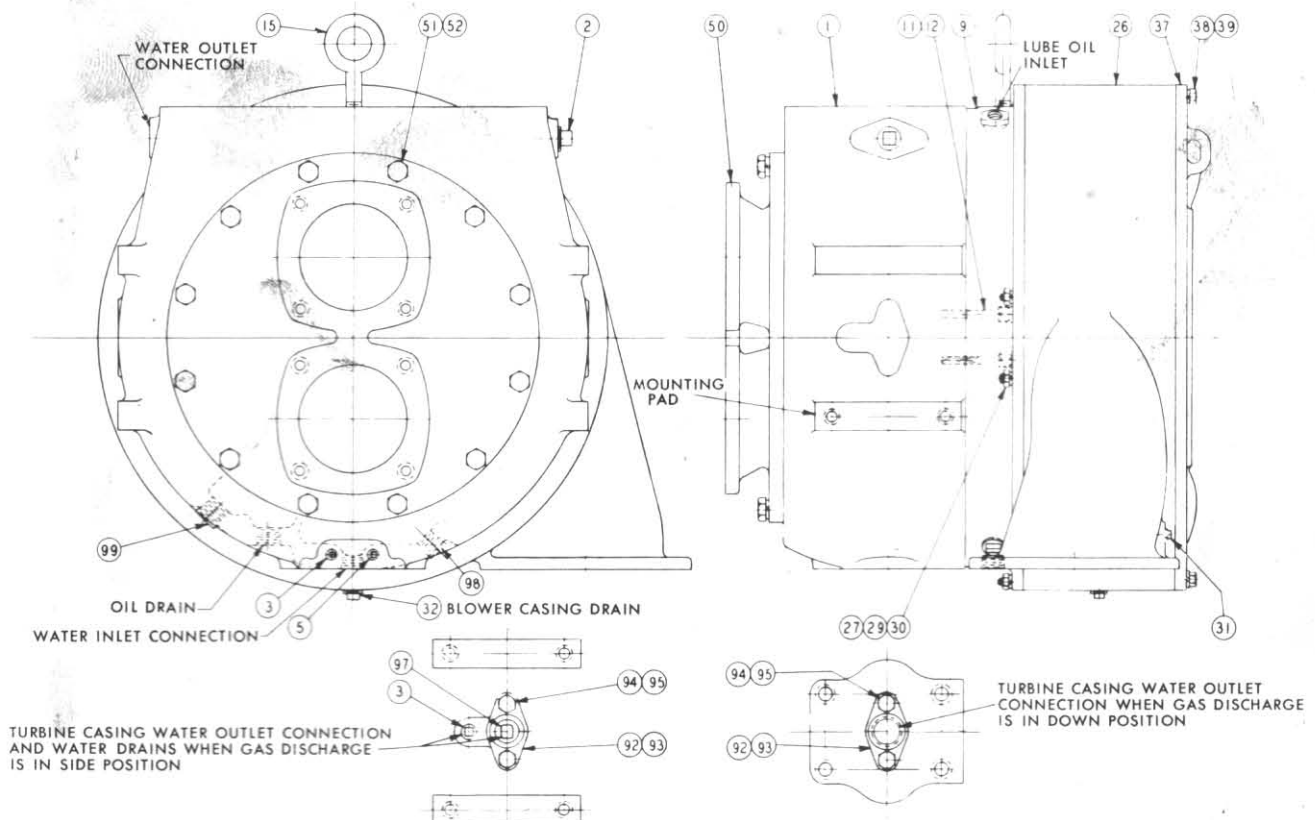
Outline Drawing L-20, L-40 and L-60 Turbocharger
